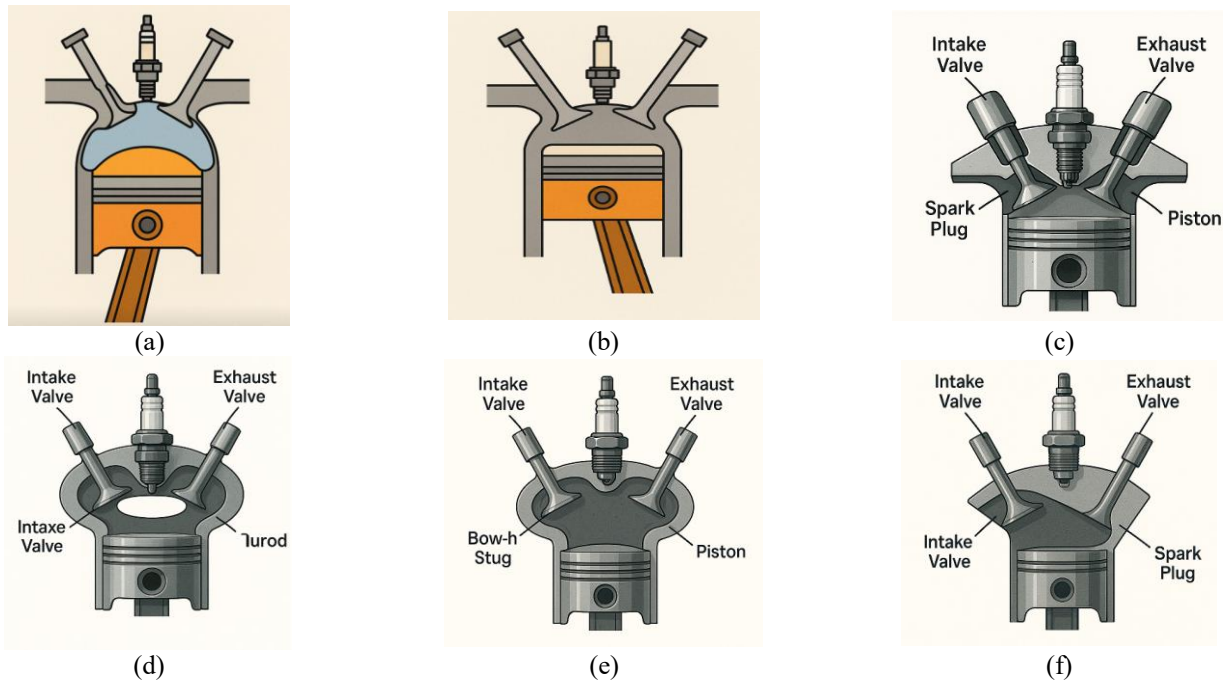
Combustion chamber types (a) hemispherical combustion chamber (hemi) (b) flat-head combustion chamber (c) pentroof combustion chamber (d) toroidal combustion chamber (e) re-entrant combustion chamber (f) wedge combustion chamber.
